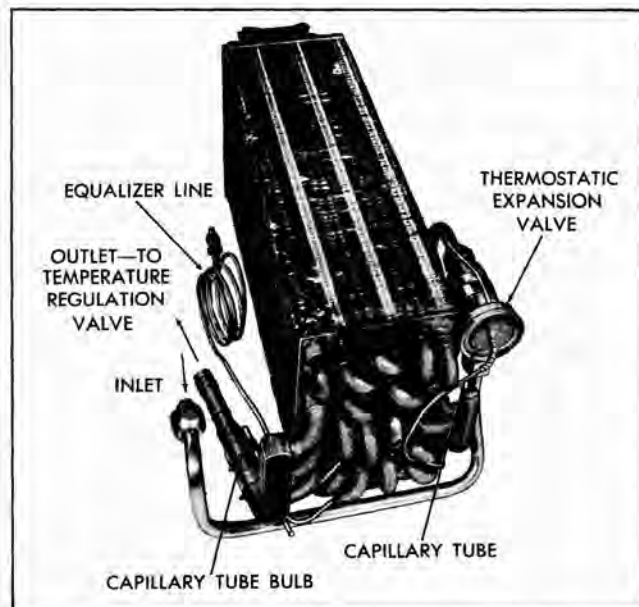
Thermostatic Expansion Valve Bulb at Evaporator Outlet Pipe
